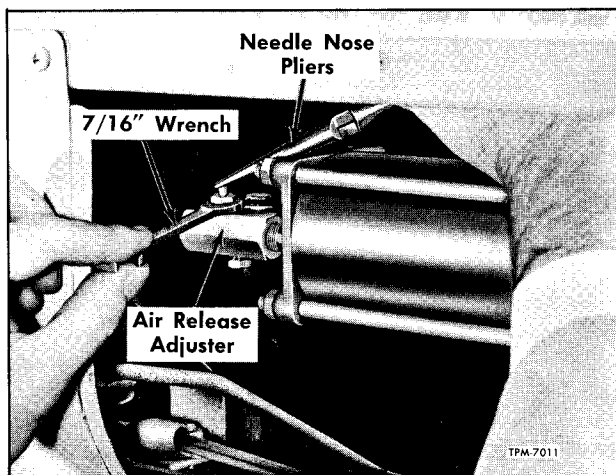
Adjusting Rear Push-Type Door Closing Speed
